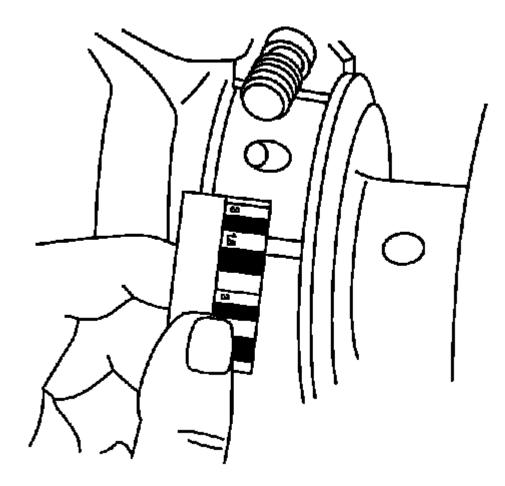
Measuring Gaging Plastic Courtesy of GENERAL MOTORS CORP.
